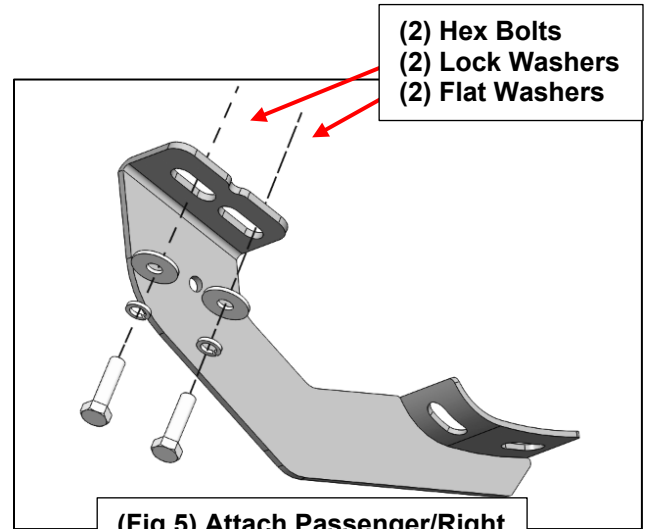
Attach Passenger/Right Front Mounting Bracket
